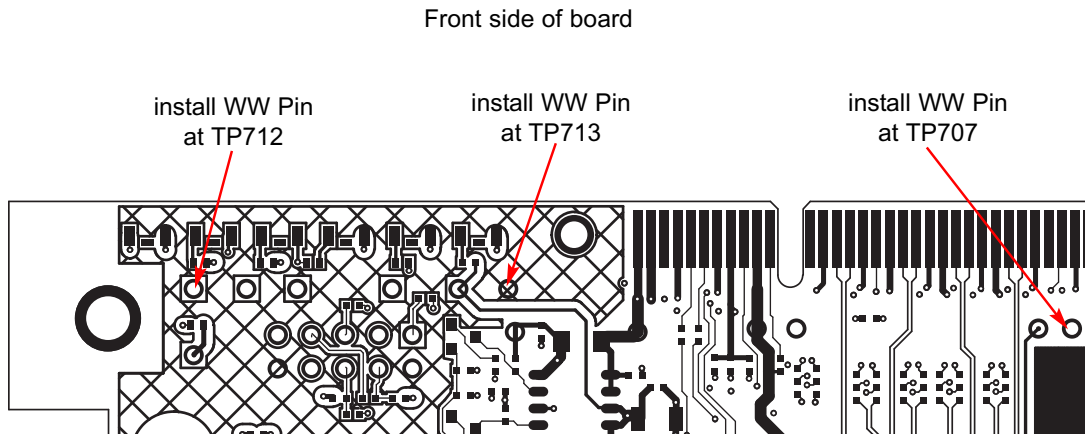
Front Side of PME-P Showing Parts to be Changed
